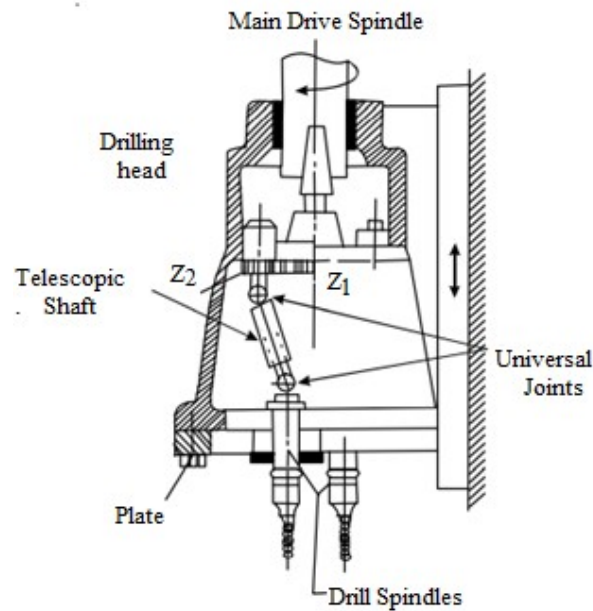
Adjustable multi-spindle machine drill press [6]
